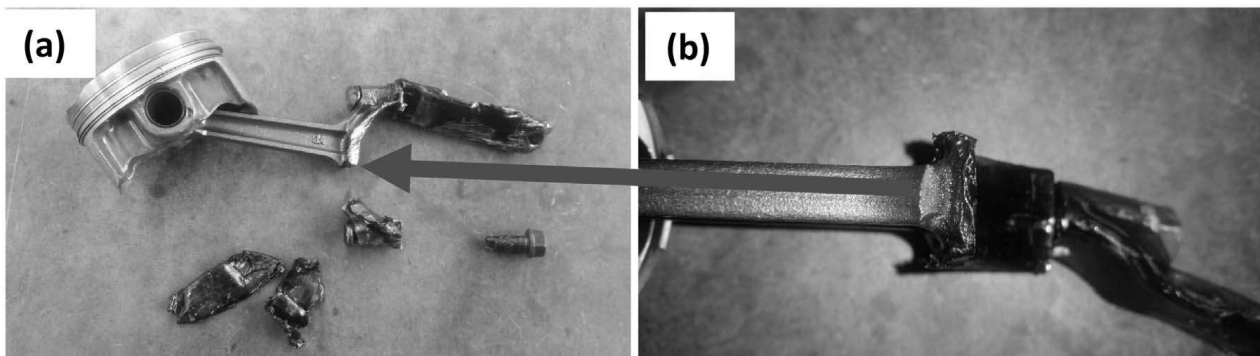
Photographs of the failed connecting rod: (a) Fractured rod shank and big end, fractured rod bolt, deformed rod cap, and melted slip bearing; (b) A closer look of the fracture point highlighted by the red arrow.
